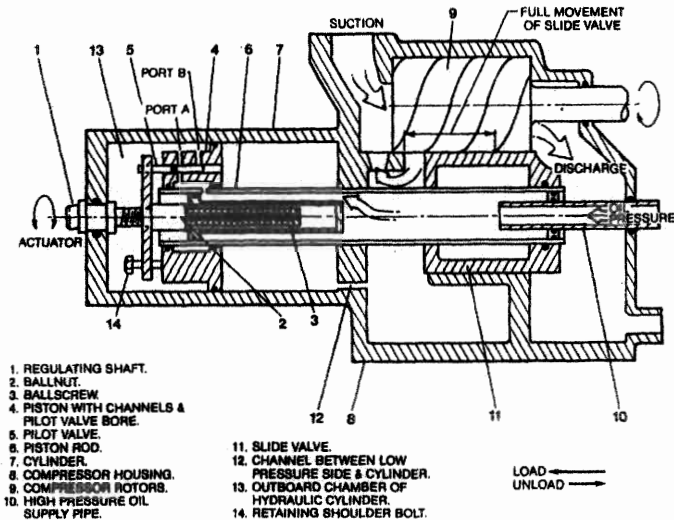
Cross section of a screw compressor. (Courtesy of Sullain)
